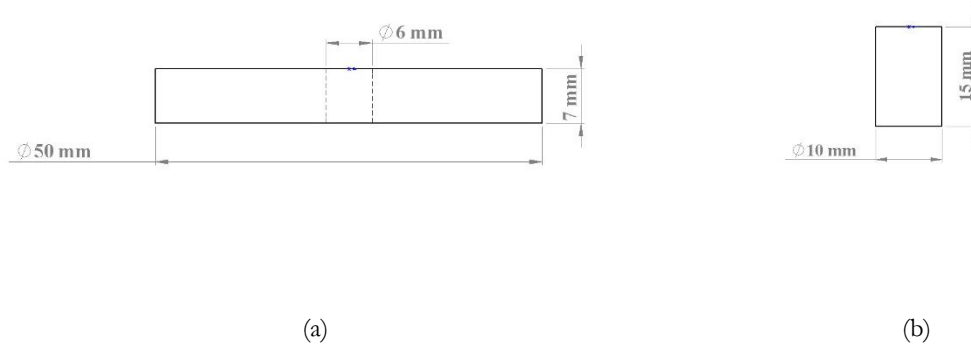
Sketch for emissions tests of brake disc / brake pad (a) Disc sample (b) Pin sample
